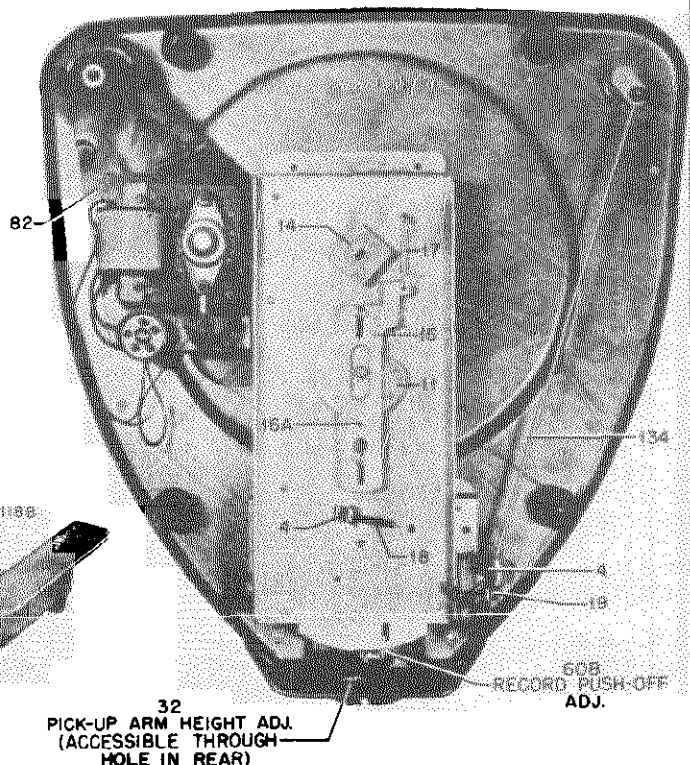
BOTTOM VIEW OF RECORD CHANGER
